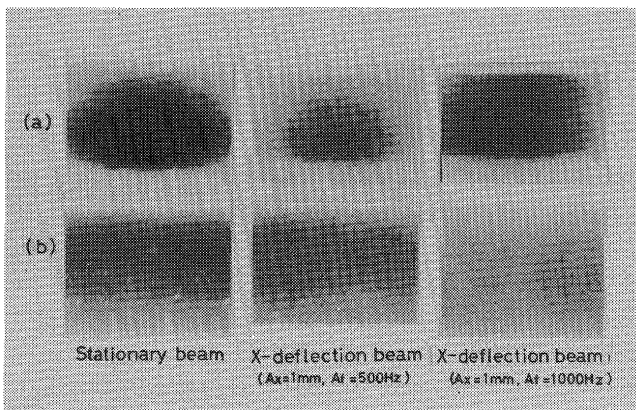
X-ray film photographed from side of weld bead by pin-hole camera and radiography (SUS304).
